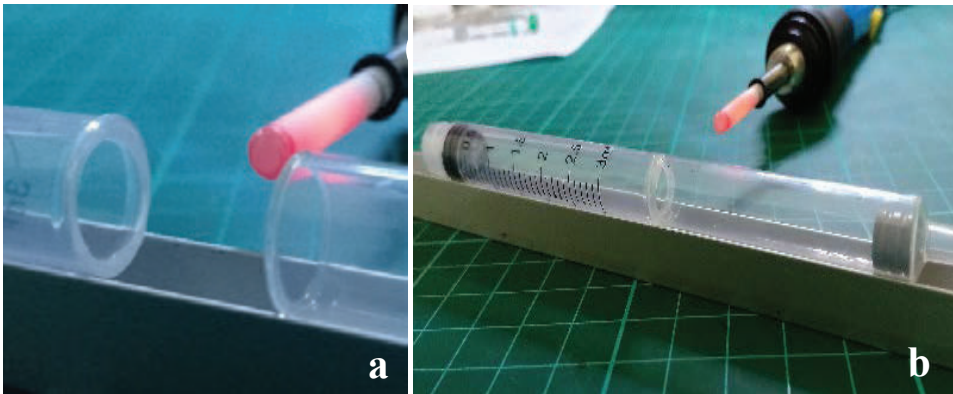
(a) Syringe barrel rim edges are melted by heat from a soldering iron while rotated to get an even tubular shape before welding; (b) Aluminium U channel is used to align syringe barrels during solvent welding.
